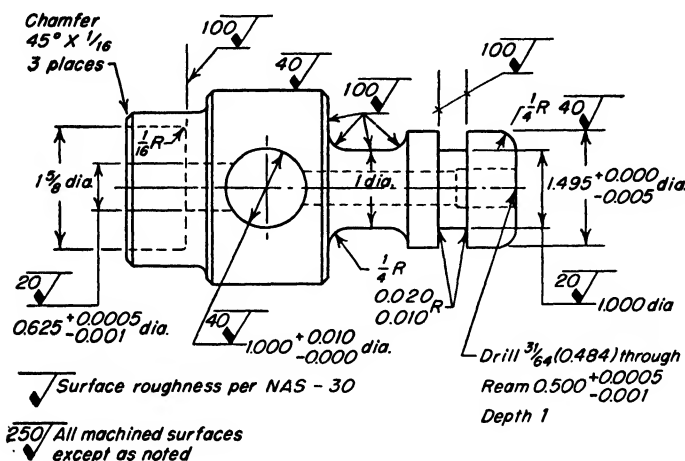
13. Use of rms microinch symbols to show finish requirements on cylindrical part requiring machining all over. (Courtesy of Surface Checking Gage Company.)
